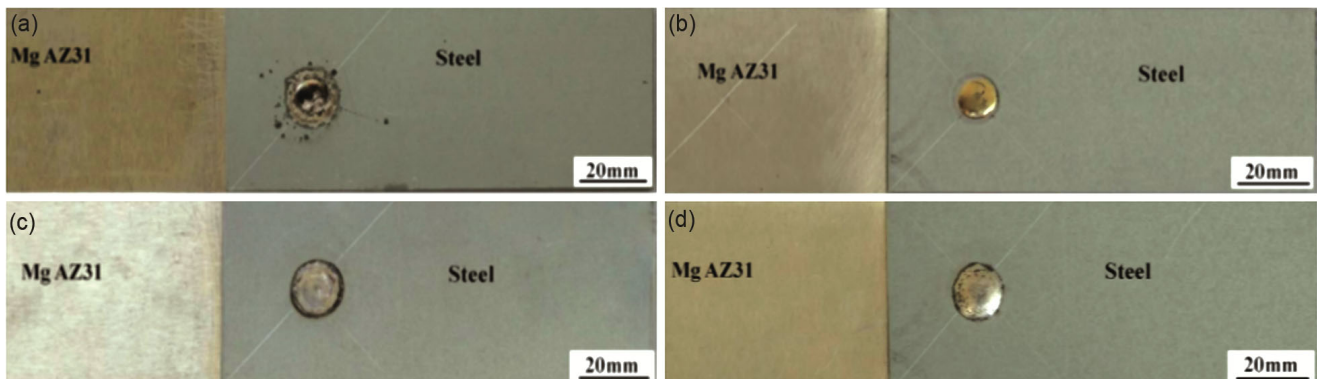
Weld quality and appearance of CMT plug joined Mg AZ31 to galvanized steel using different wires (a) H08Mn2SiA weld wire, (b) ER Cu Ni-Al weld wire, (c) NRNiCu-7 weld wire and (d) Mg AZ61 weld wire³⁹.
